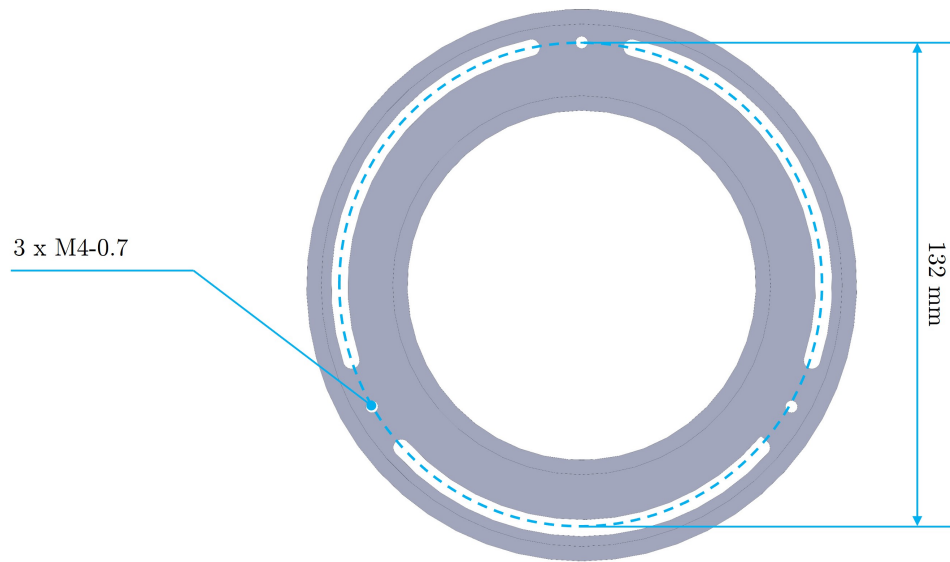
Dimensional drawing of a mounting plate with three M4-0.7 mounting holes spaced 120° apart on a 132 mm circle.
